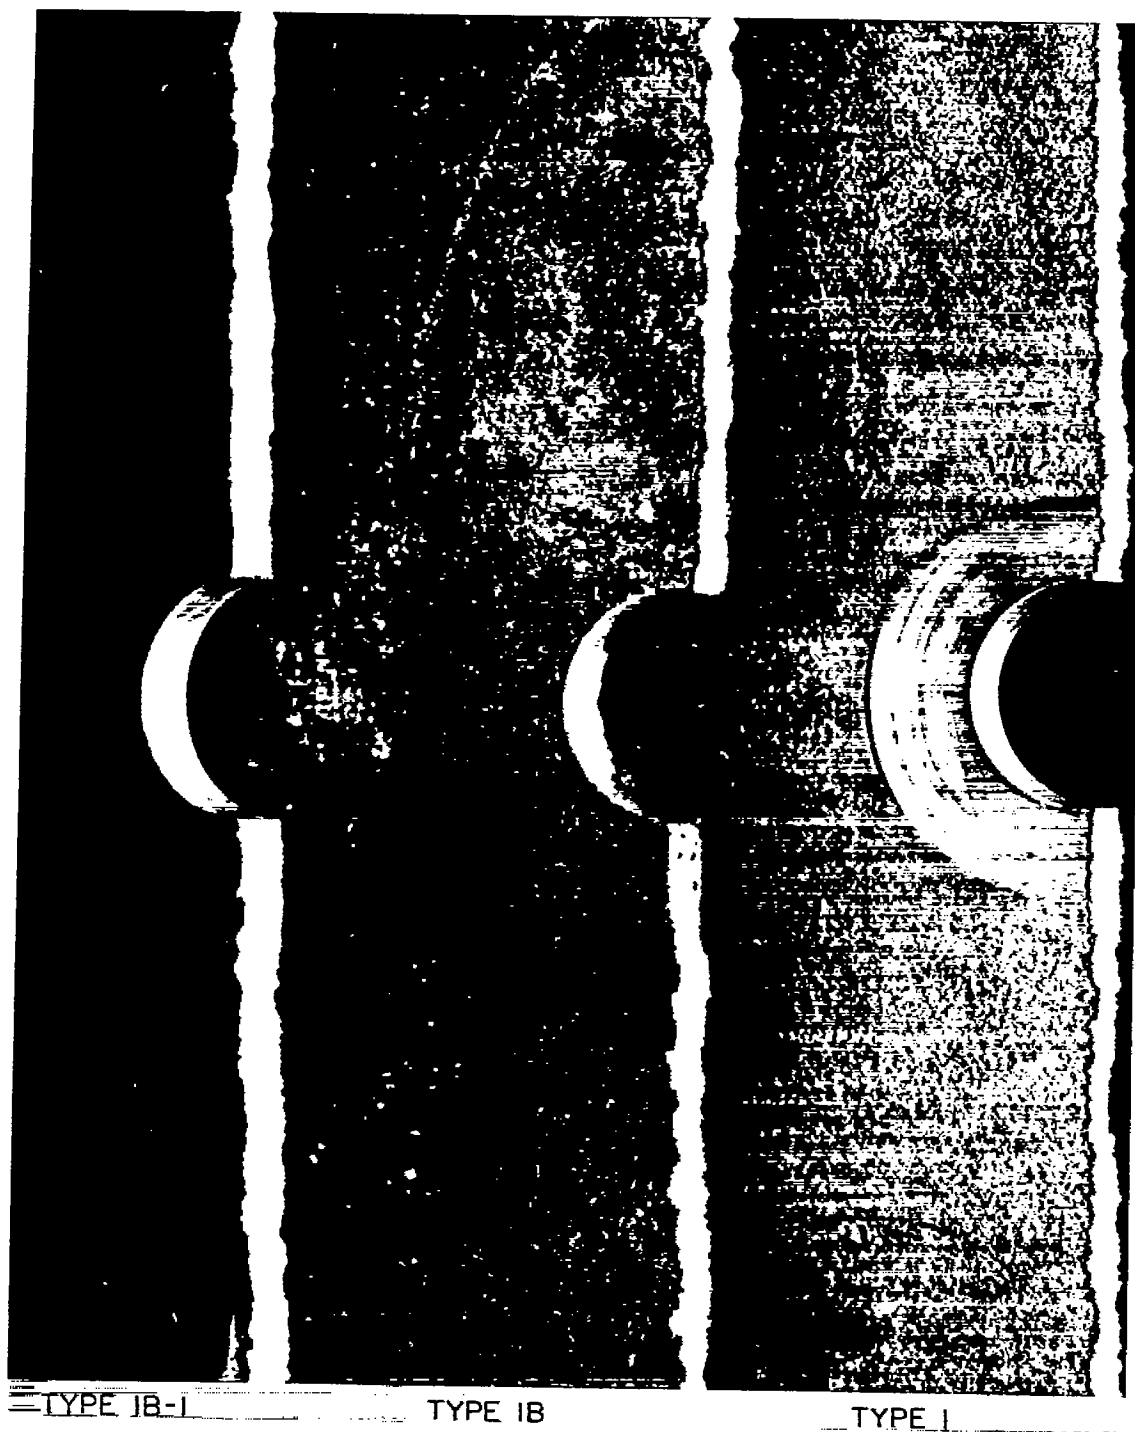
Conditions of open hole in monobloc sand-cast specimen. L-82097
